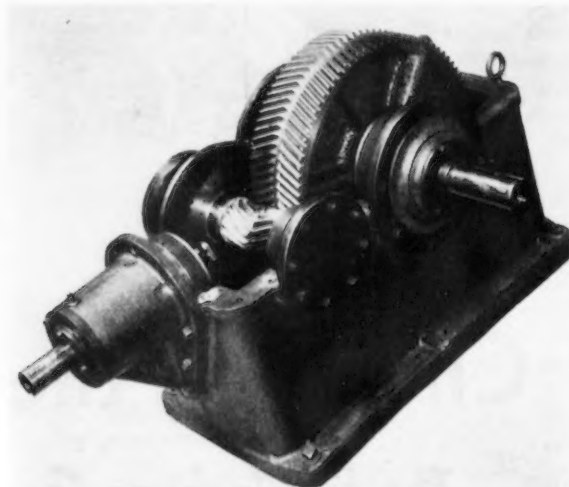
Using spiral bevels in place of one pair of herringbone gears permits right angle driving as a third variation in design.
